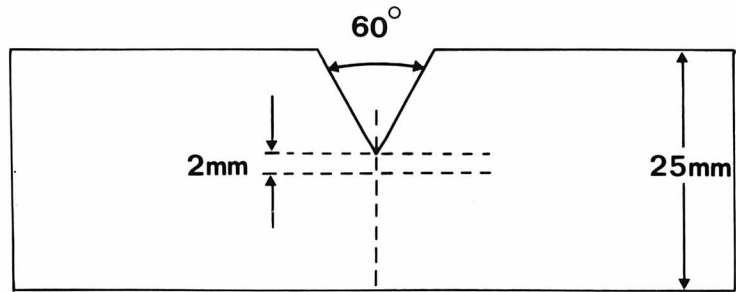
Joint preparation for one pass submerged arc welding.
